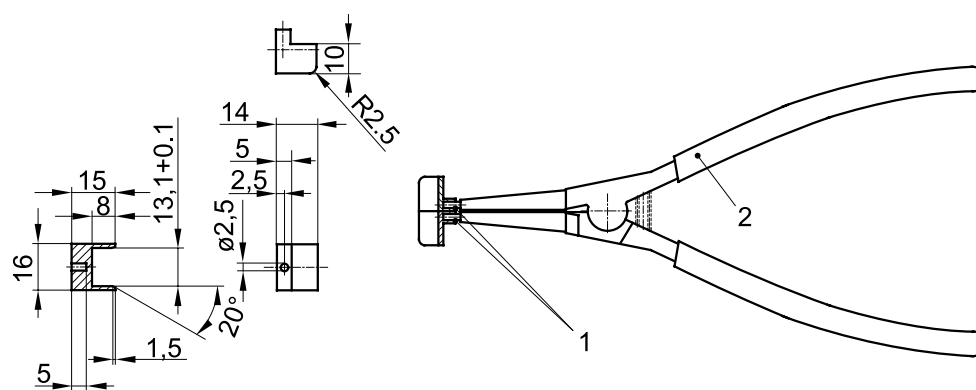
Tool for loosening the cable plugs for the temperature sensor from the cable harness
